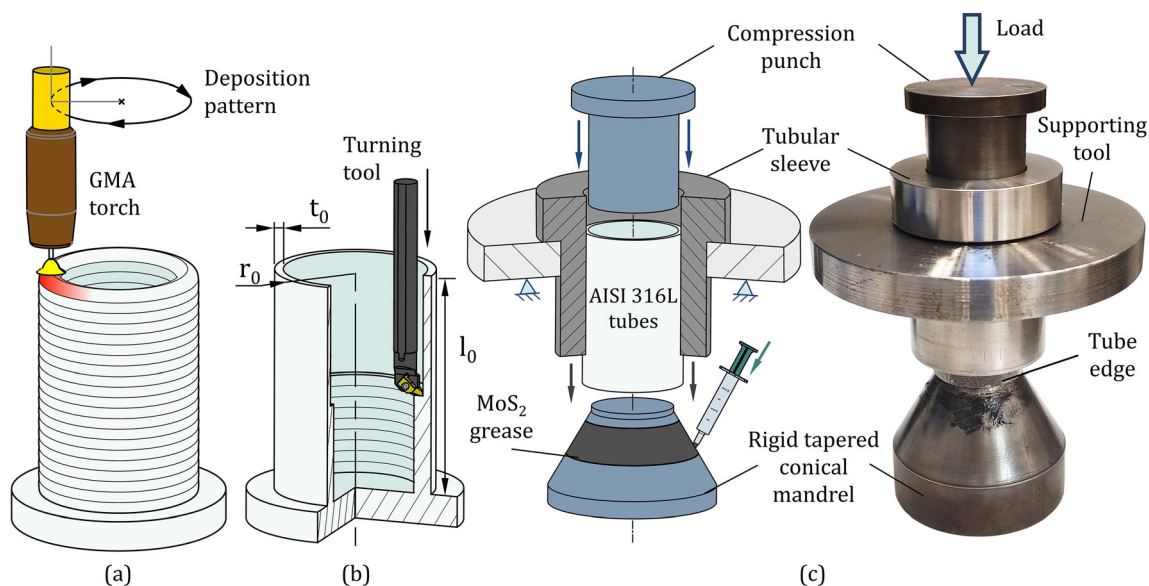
Schematic representations. a Deposition of the AISI 316-L stainless steel tubular preforms. b Subsequent machining operation. c Expansion with a rigid tapered conical mandrel
